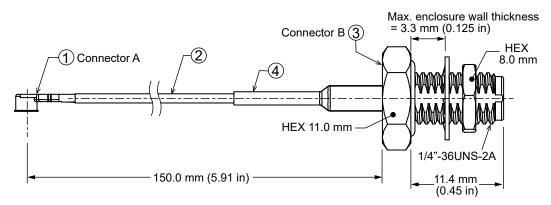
Product Dimensions for the CSI-SGFI-150-UFFR Cable Assembly
